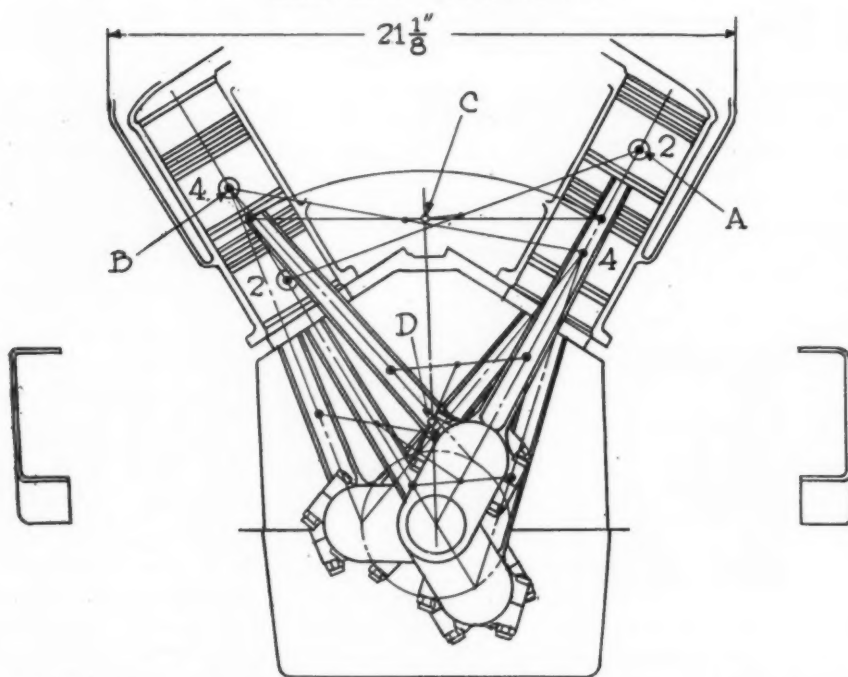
Partial cross section of the twin six motor of 3 in. bore by 5 in. stroke with a total piston displacement of 424 cu. in.
